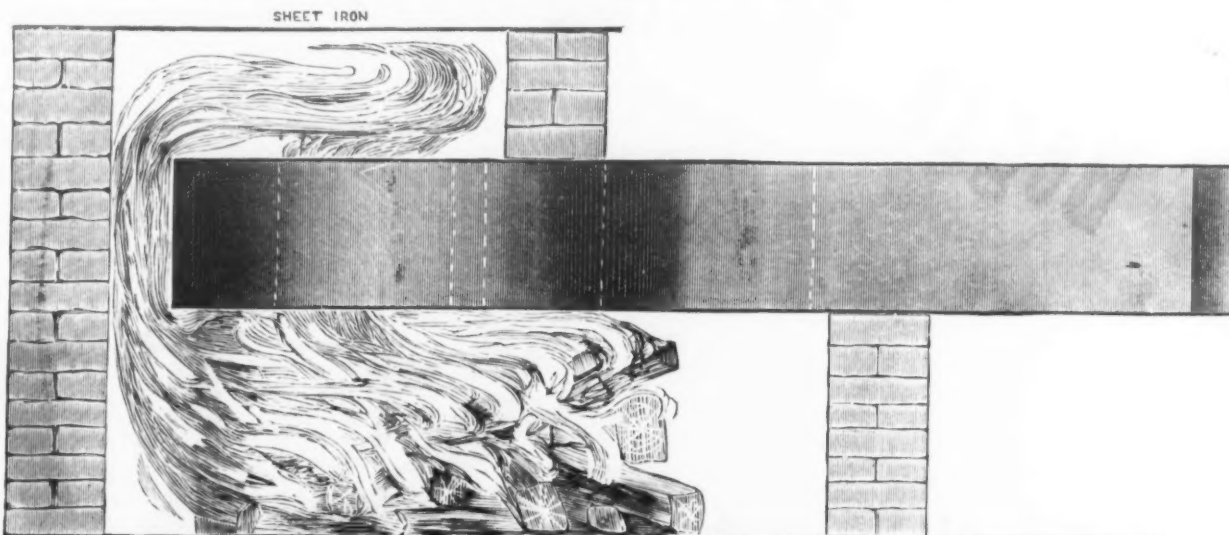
Heating the Crank in a Wood Fire Preparatory to Shrinking on Shaft.
